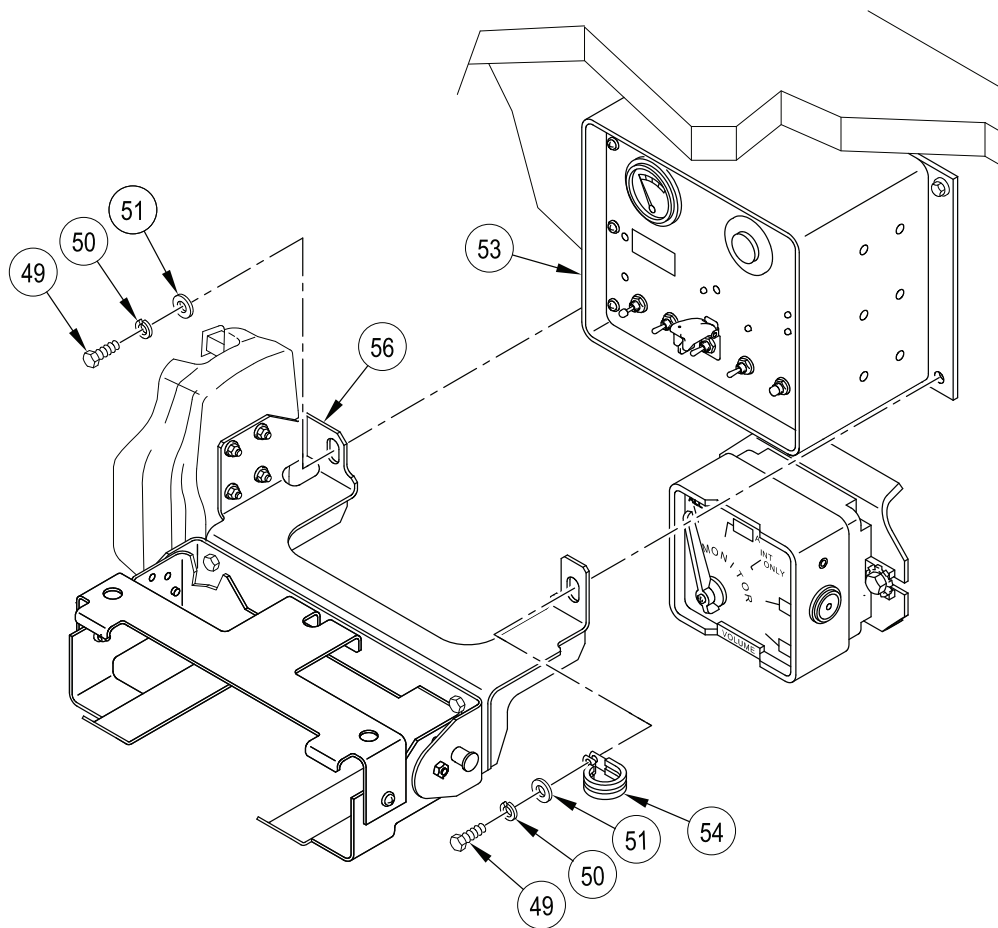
RCU/PDA Bracket Assembly Installation (M577A3 Only)
